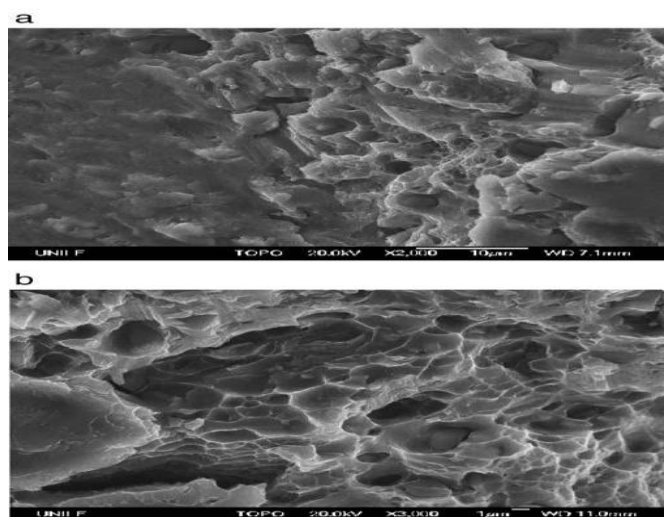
Very fine dimples observed at higher magnifications on the fracture surfaces of the specimens tested in fatigue at 210 (a) and 160 (b) MPa stress amplitude
